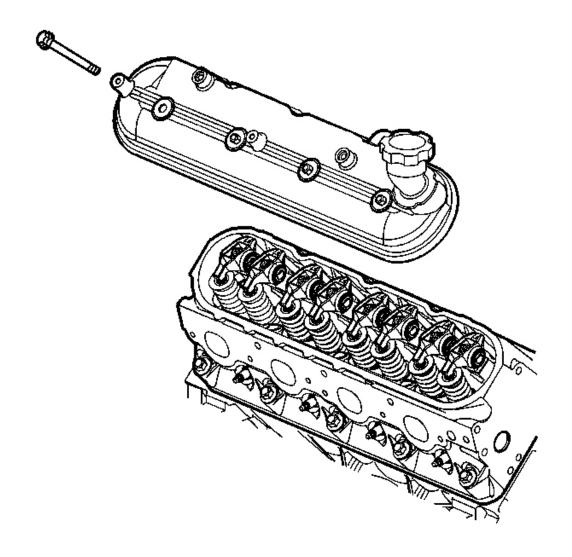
View Of Valve Rocker Arm Cover & Bolts (Right) Courtesy of GENERAL MOTORS CORP.
